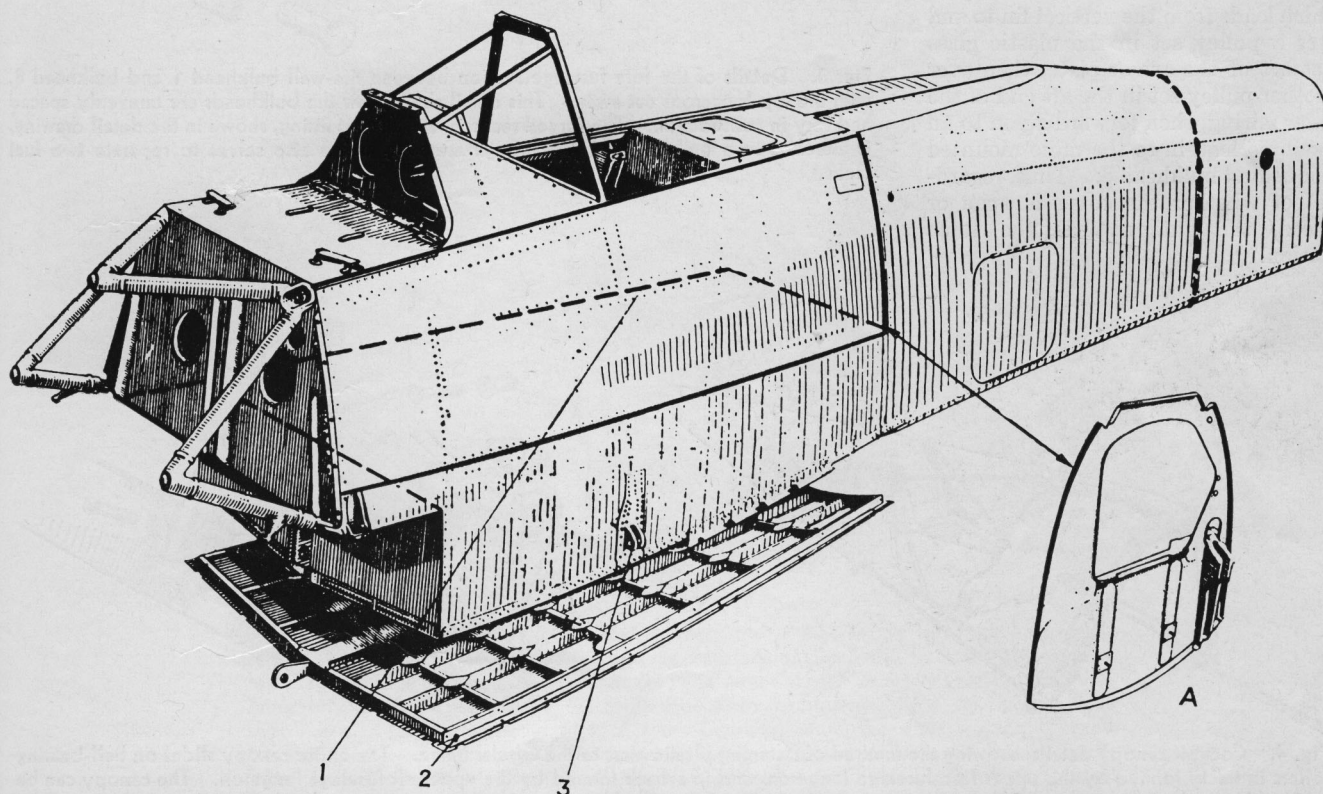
Fore-and-aft sections of the fuselage. The fore section, which is the heart of the plane, extends from the fire wall aft to bulkhead 8, which is shown in detail A. This section is divided into upper and lower sections, separated by the cockpit floor, which is indicated by dotted lines 1. The lower section contains fuel tank bays which are covered by single skin panel 2. This is quickly detachable by loosening nine screws along each side and five in each end. The rear spar fuselage attachment fitting is shown at 3.
